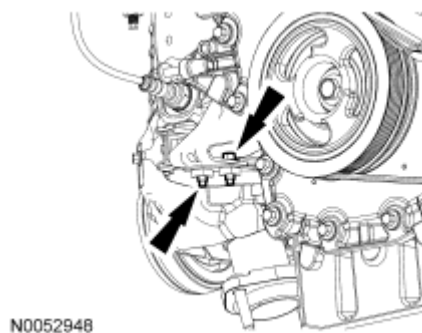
Identifying Intermediate Shaft Bearing Support Bracket & Nuts
